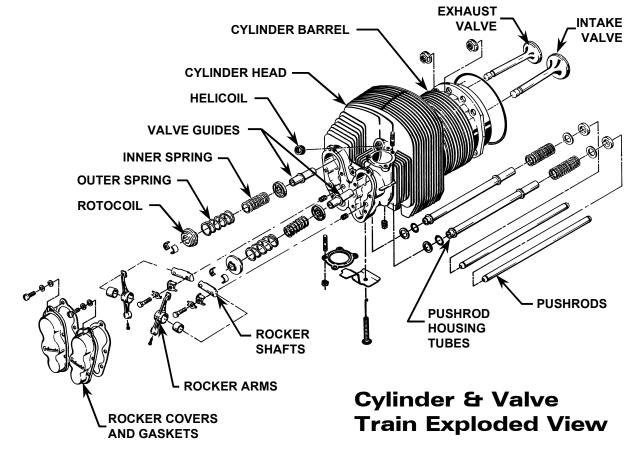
550 Cross Flow Style Cylinder Exploded View
